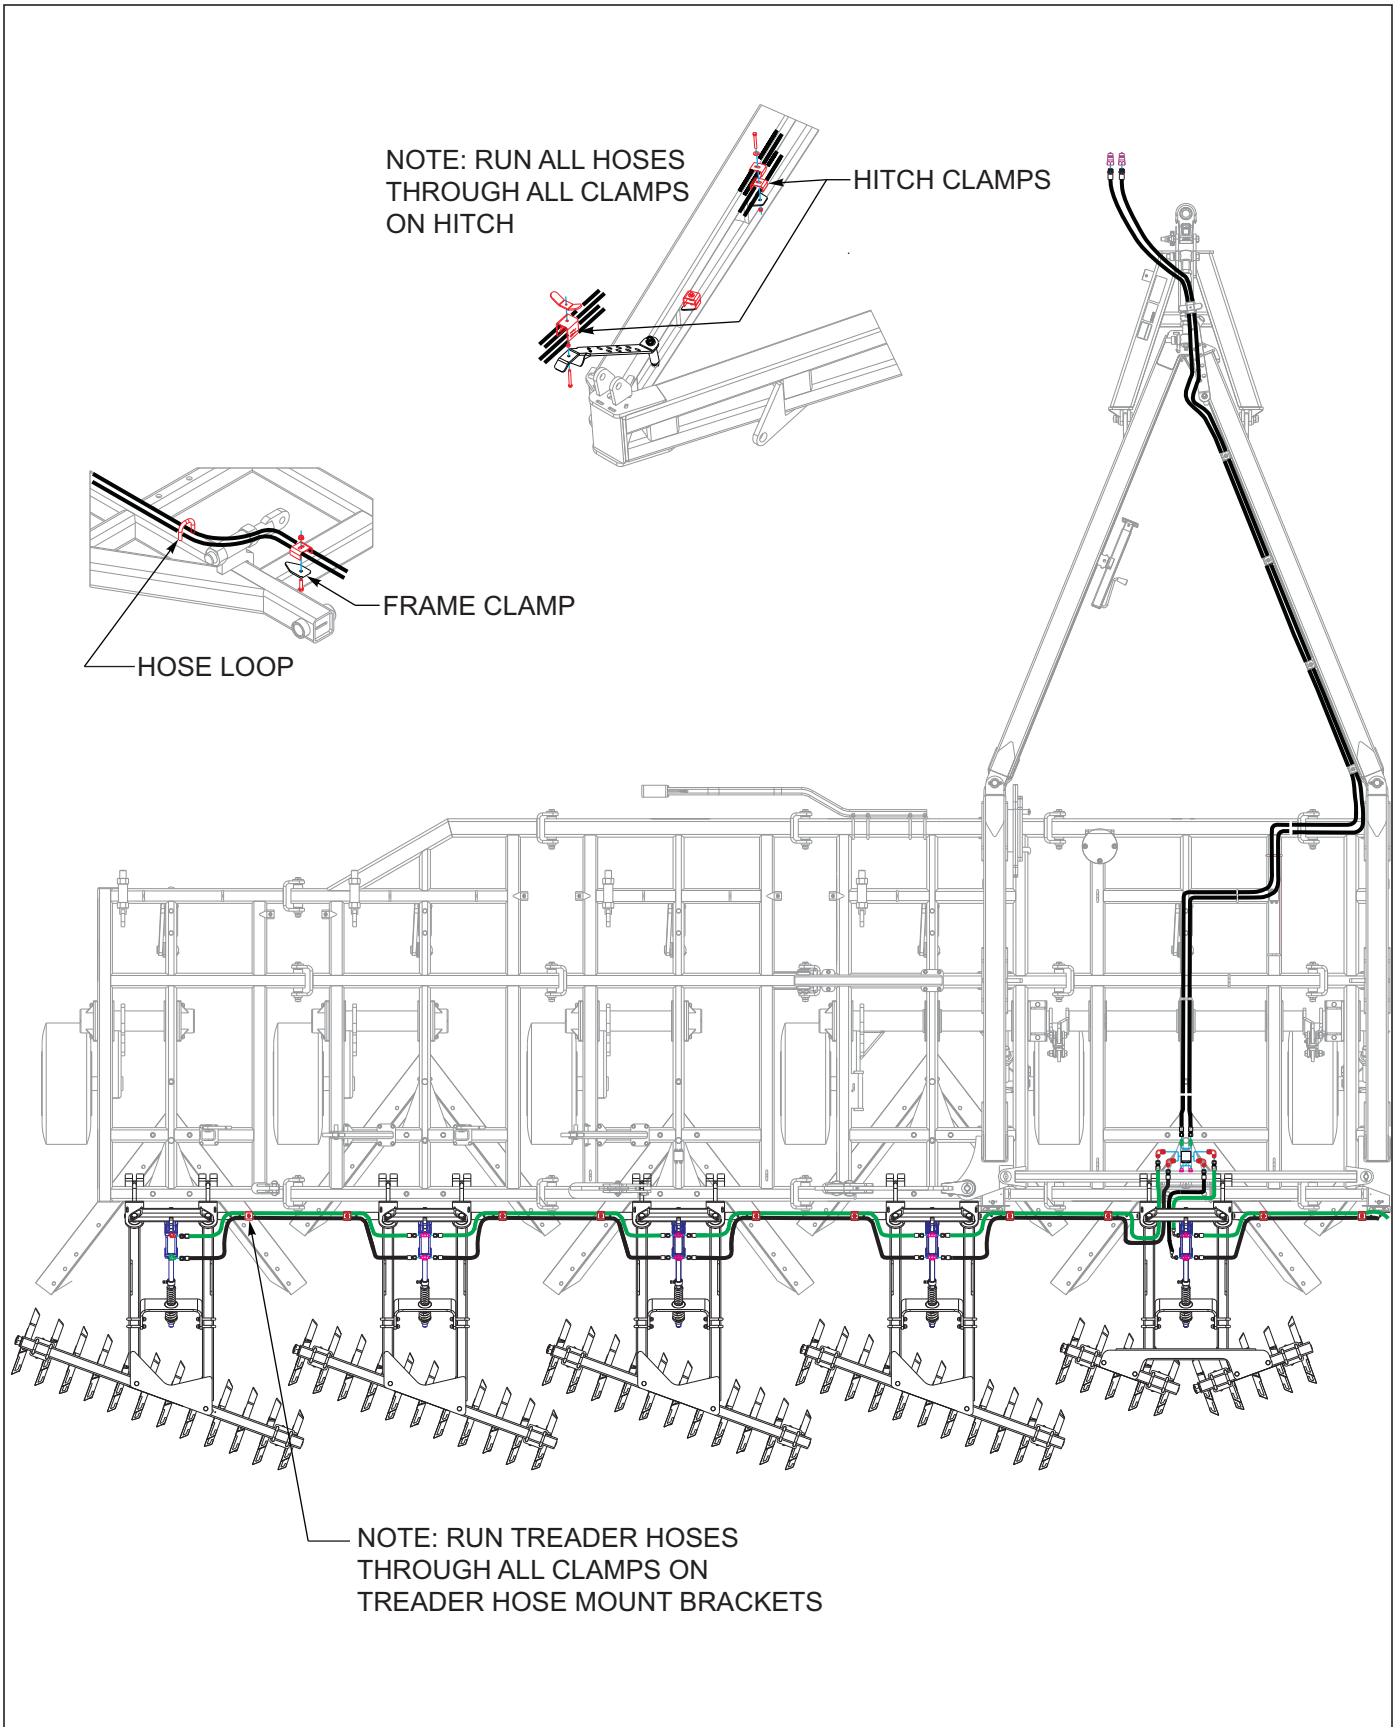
Treader Hydraulic Layout LH 1770-40' & 1790-52'
